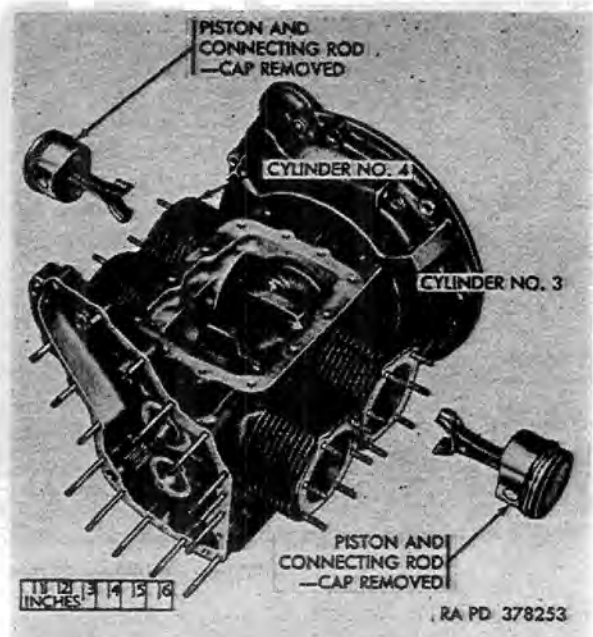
Removal of pistons and connecting rods from cylinders No. 3 and 4.
